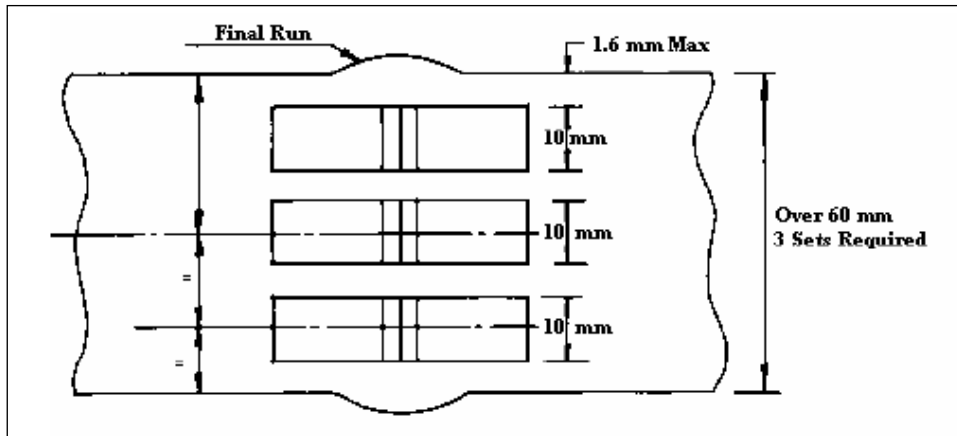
Illustration of impact test specimen sets [2013As2].
